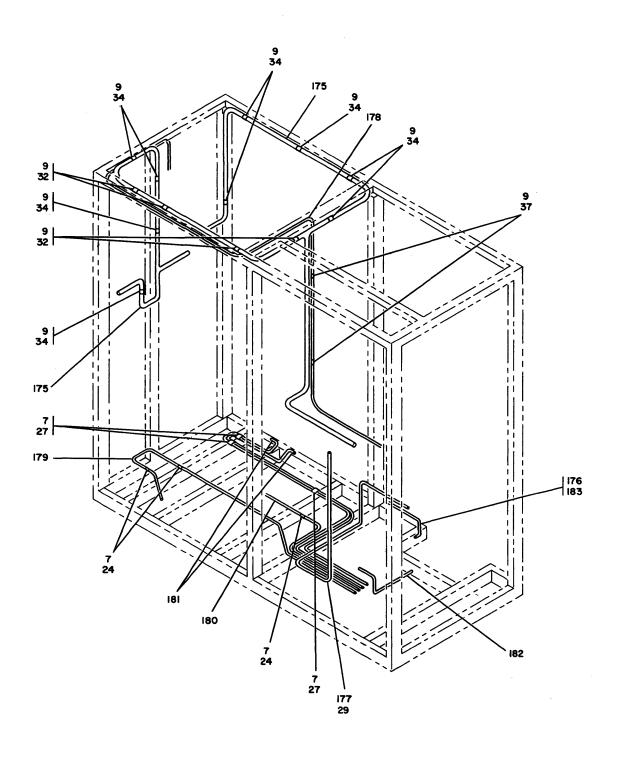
A. FINAL ASSEMBLY-2803. SHEET 4 OF 4. SEE LIST 1A.
